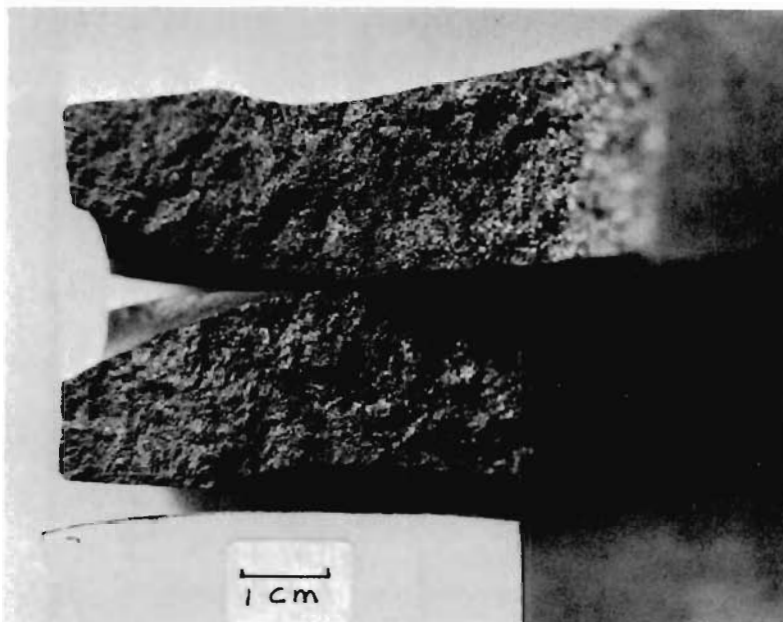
CRACK SURFACE OF KNORR NEAR INNER RADIAL EDGE. THE BRAKING SURFACE IS THE TOP EDGE OF THE UPPER PART AND THE BOTTOM EDGE OF THE LOWER PART. THE REGION TO THE LEFT LACKING LUSTER IS THE ORIGINAL CRACK SIZE; THE REST OF THE CRACK SURFACE IS FROM THE OPENING OF THE CRACK. THE DEPRESSION THAT FORMS ON THE BRAKING SURFACE IS A RESULT OF WEAR.
